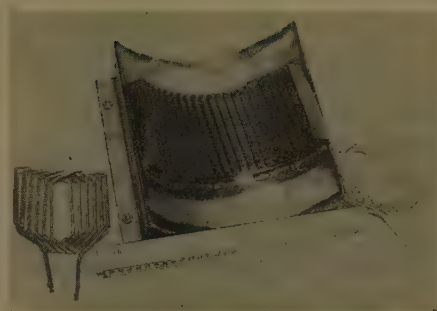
Photograph of statolette fixture and coils, prior to assembly
